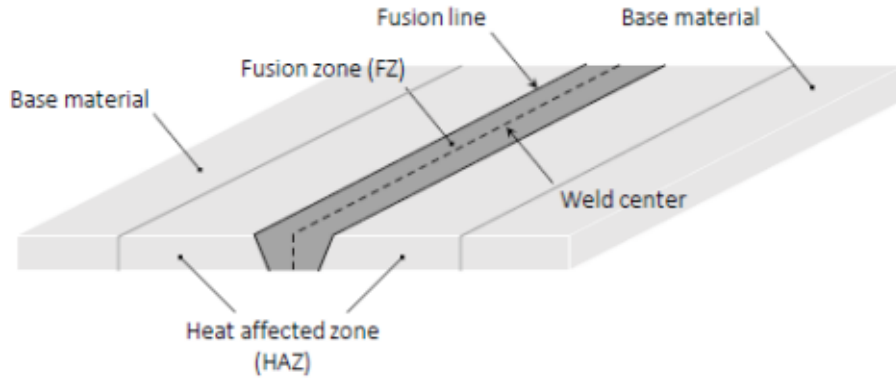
An illustration of the different zones in a fusion welded plate [26].
